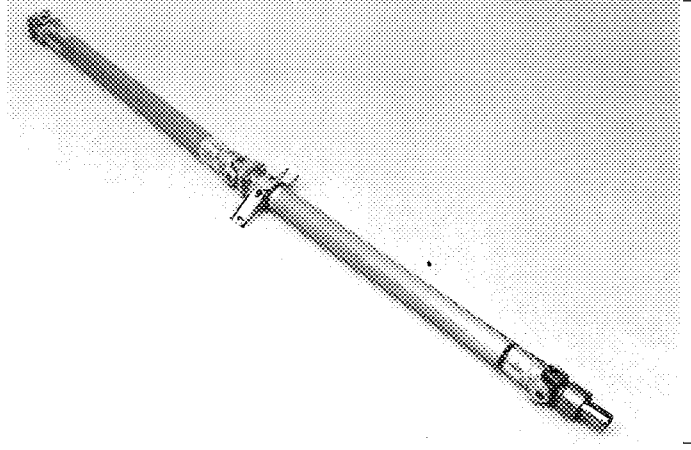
DRIVESHAFT ASSY - FRONT
